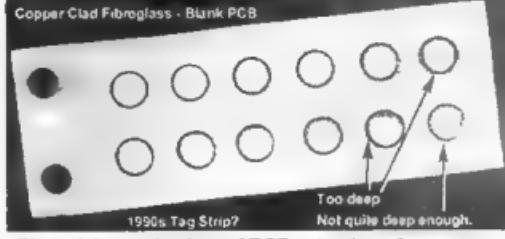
A sample piece of PCB cut with an 8mm ms tube. (The two holes were already in the PCB.)
